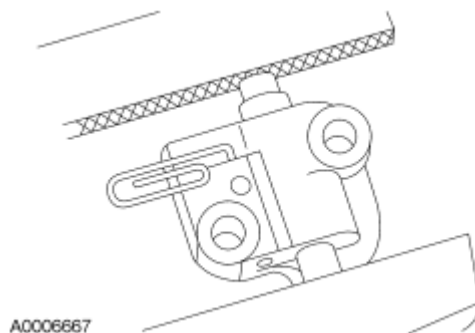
Retaining Tensioner Piston With 1.5-mm (0.06-in) Wire Or Paper Clip
